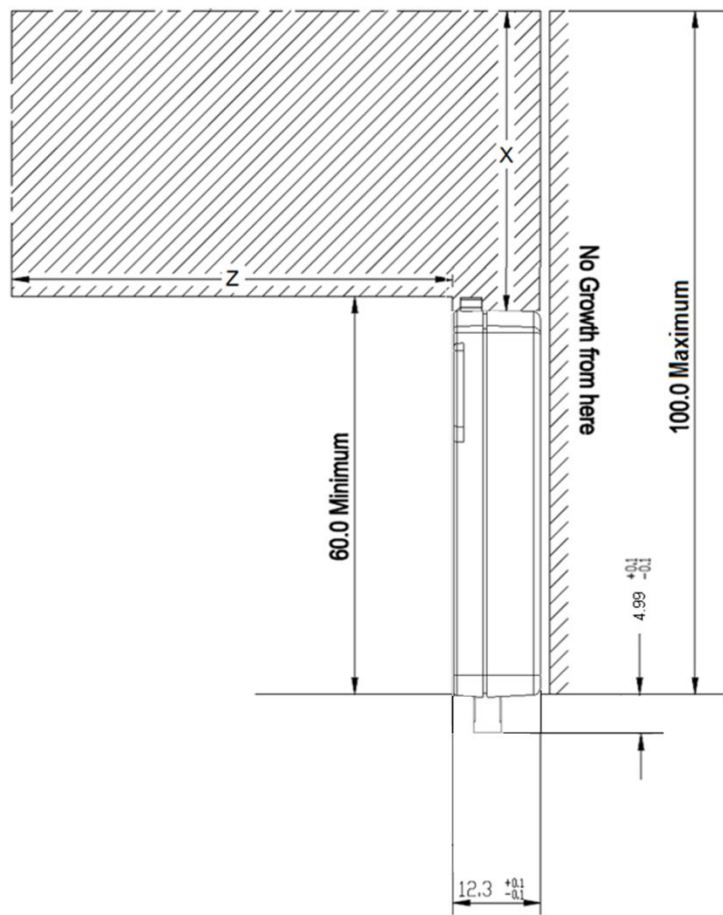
DC Form Factor Housing Dimensions – Side View
